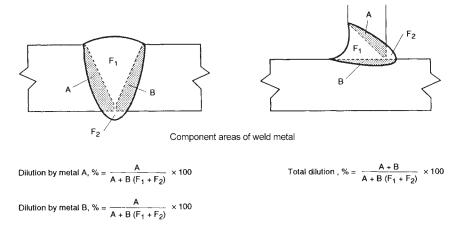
Dilution in a dissimilar-metal welded joint. Source: Ref 10.1
